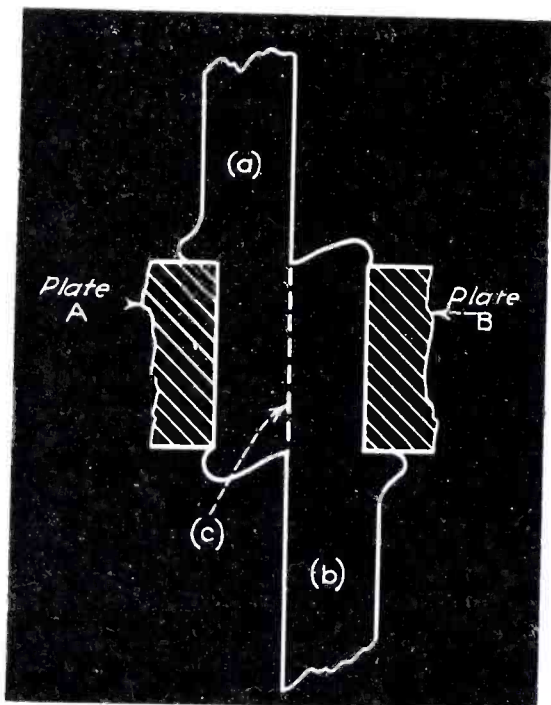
Drawing showing result of typical hot-plate bond. Note extrusion at surfaces contacted by plates, caused by excessive softening of the outer surfaces of the material
